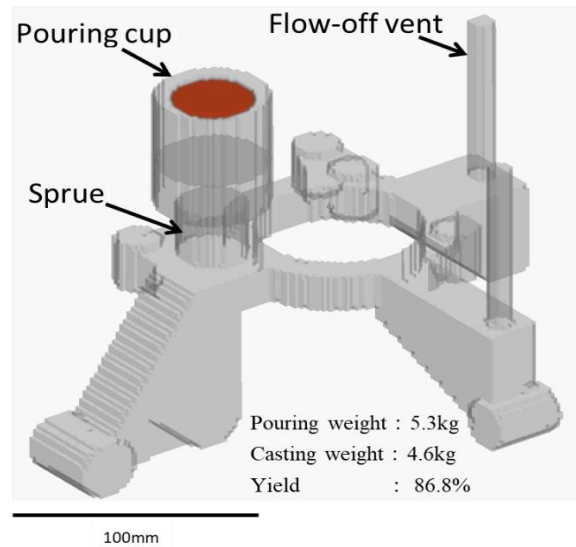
Cast design of steering knuckle for automobile which was deformed for this study.
